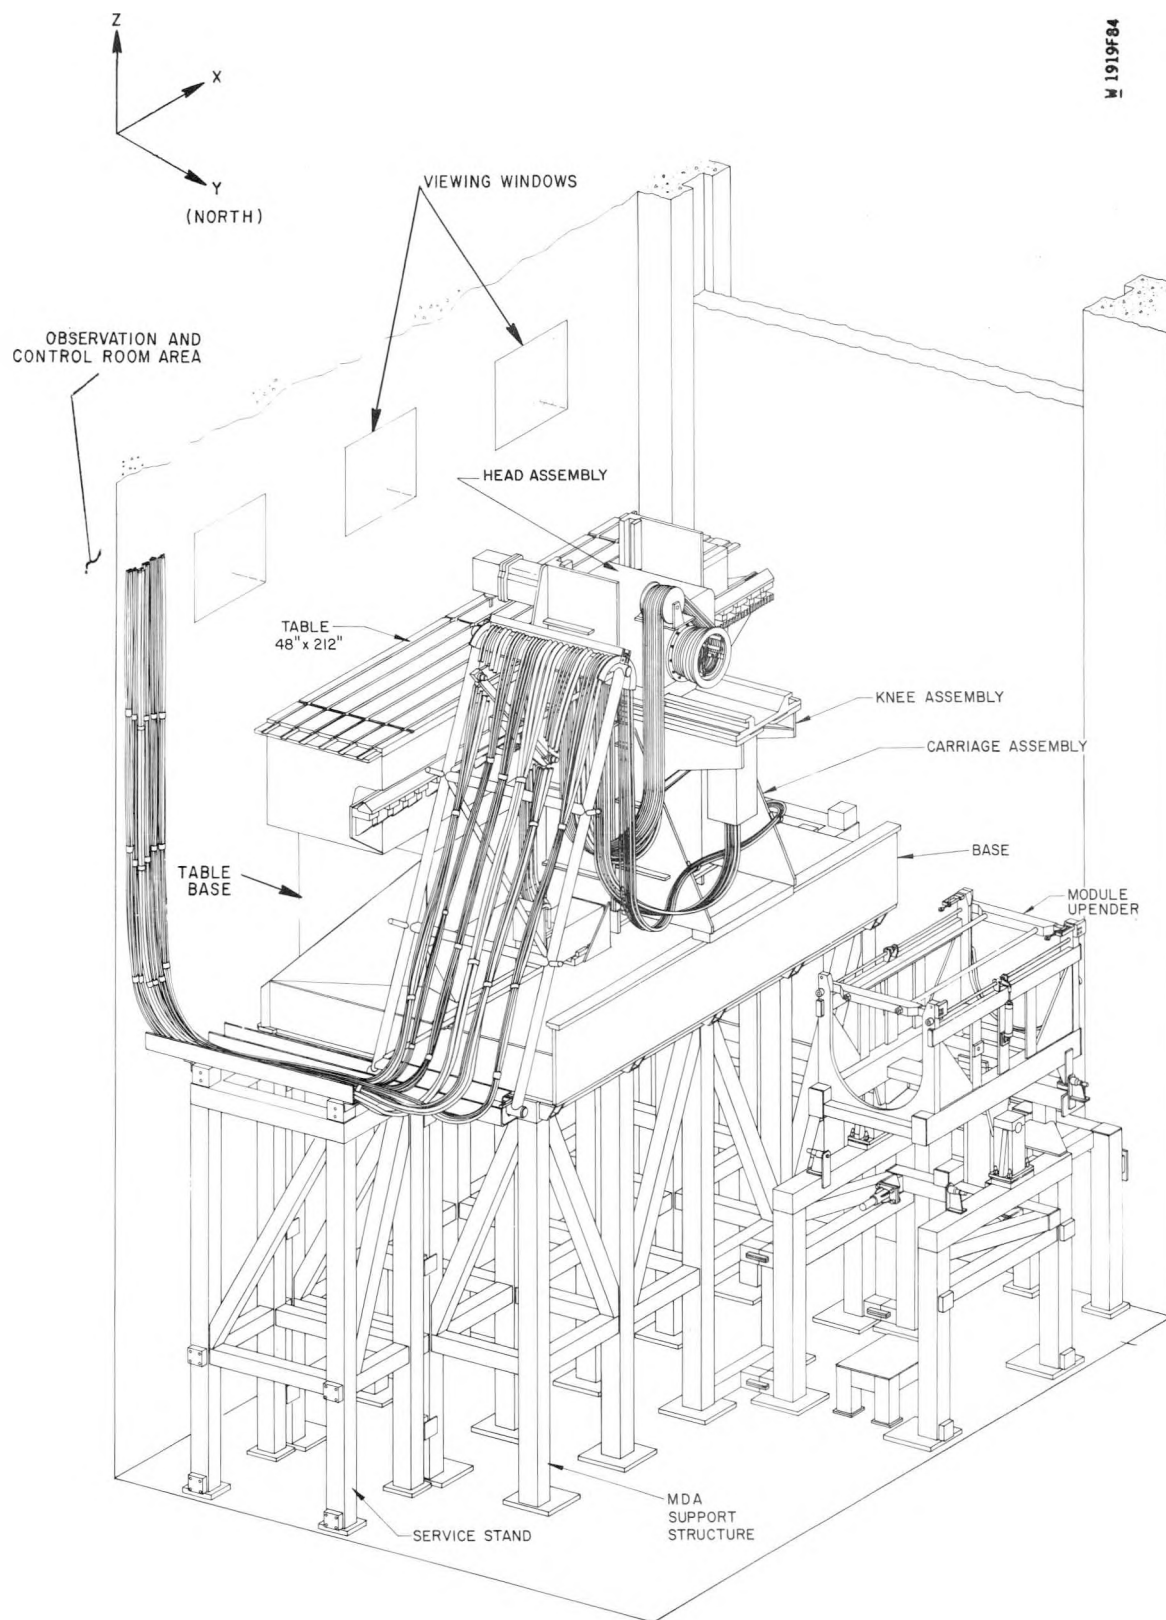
LWBR Module Disassembly Apparatus (MDA)
